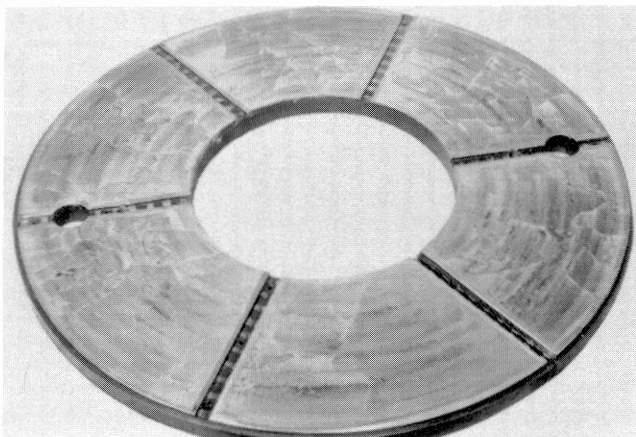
Ratcheting of a Thrust Bearing Due to Overheating.
